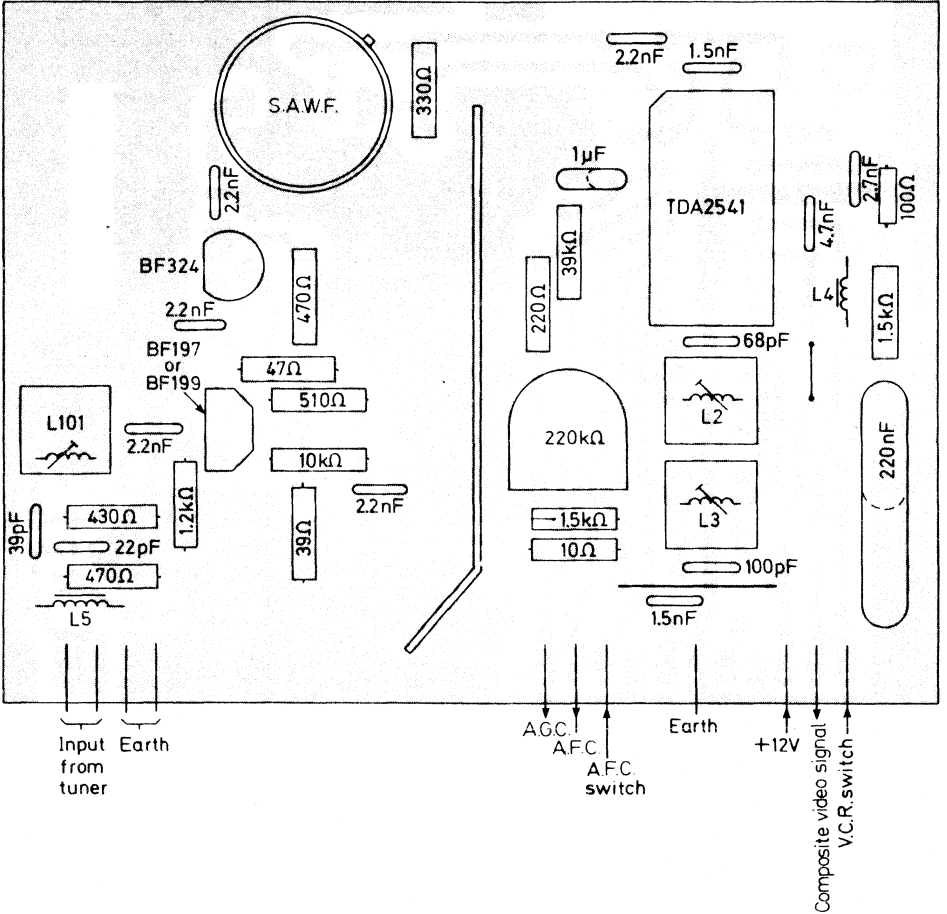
Recommended printed circuit board layout for surface acoustic wave filter and pre-amplifier
